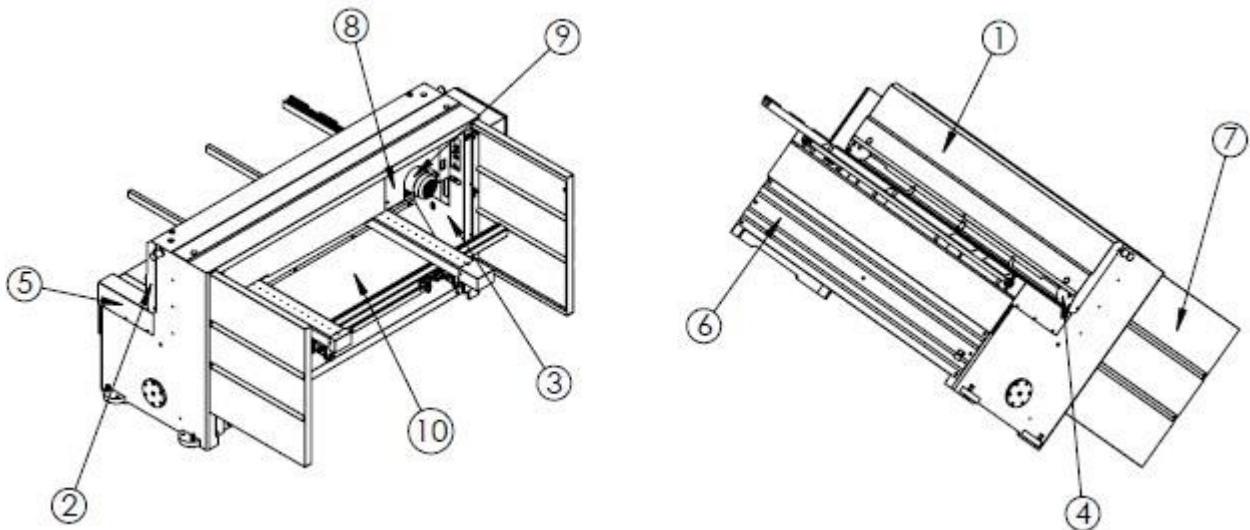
A SERIES Sheet Covers and Backgauge Drive Motor
